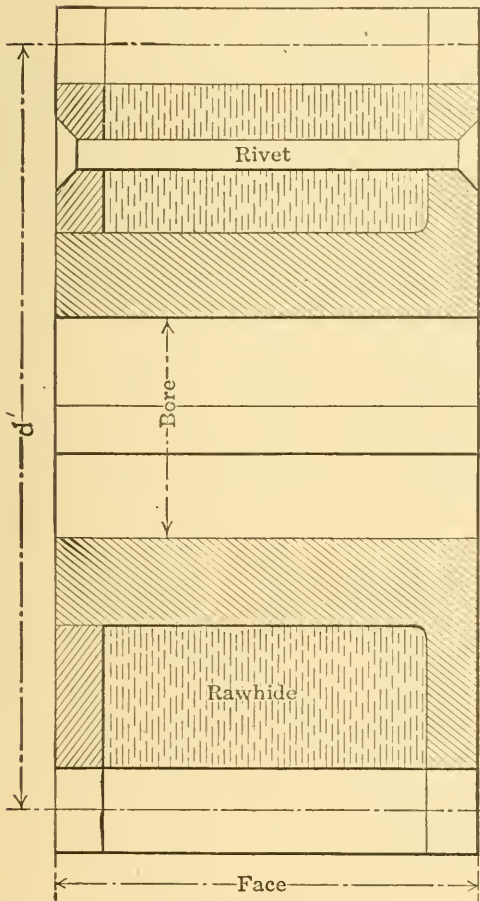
BUSHING AND FLANGE IN ONE PIECE.
